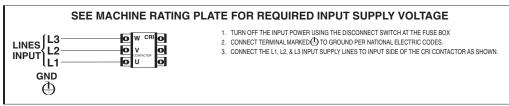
Reconnect Panel Board Positions for 380/500 VAC Machines
